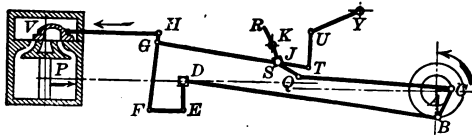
WALSCHAERT GEAR, OUTSIDE ADMISSION, SET FULL GEAR FORWARD
